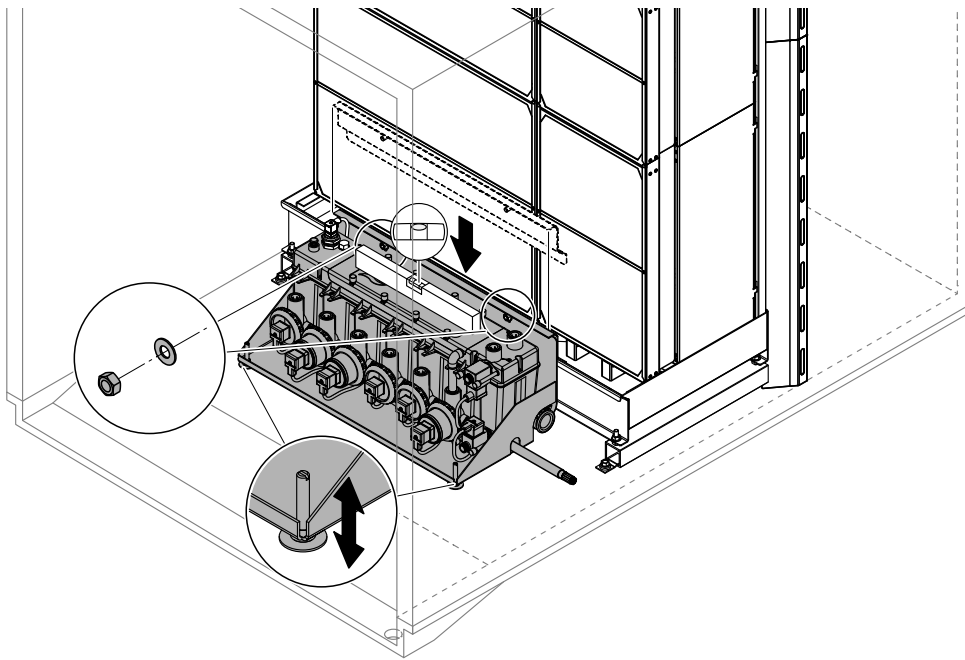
Mounting the Hydraulic Module of ME Circulating System (internal installation)
